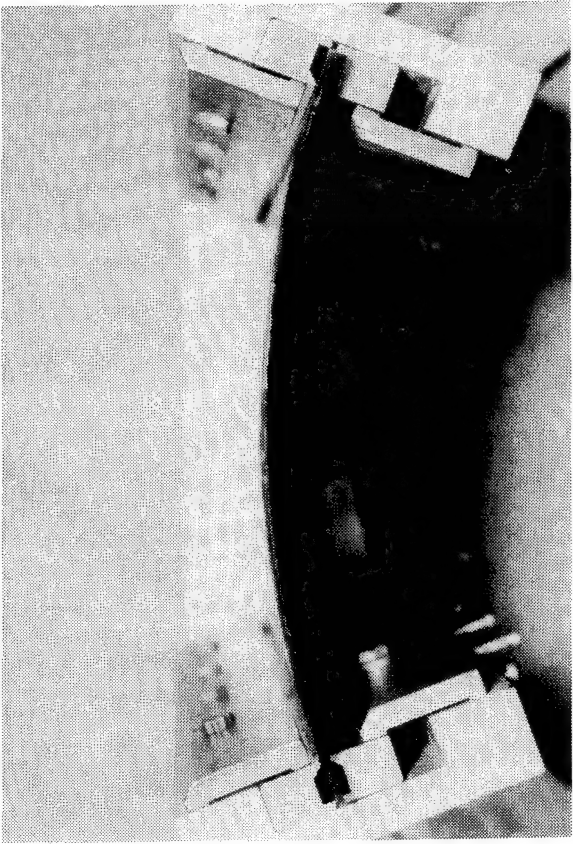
Top View of Test Fixture Showing Simply-Supported Sides
